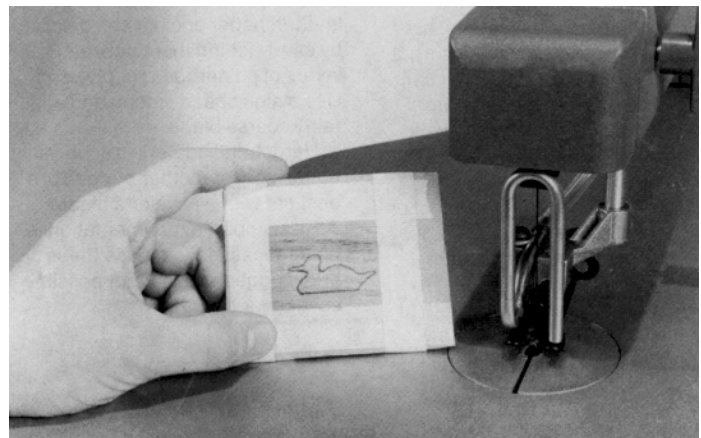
Tape veneer to cardboard or posterboard for added support and a cleaner cut.
